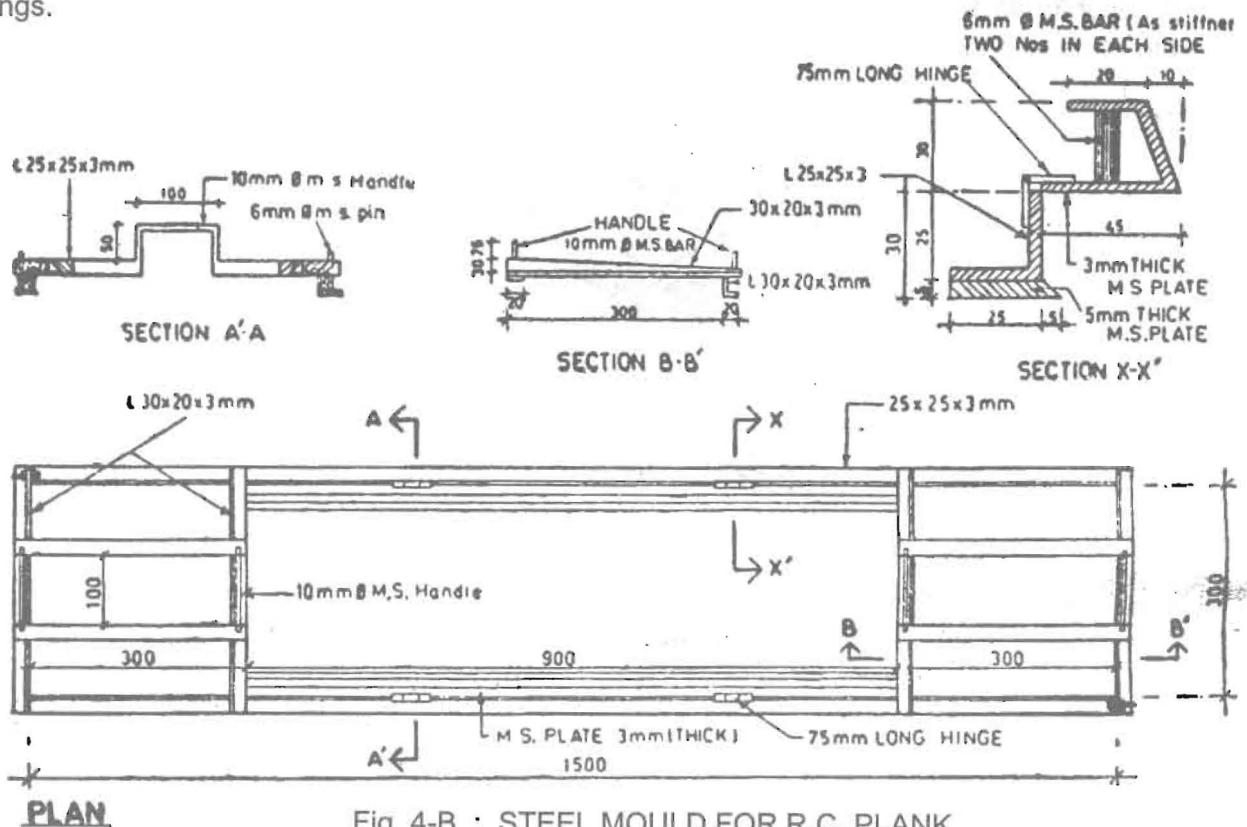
B : STEEL MOULD FOR R.C. PLANK
